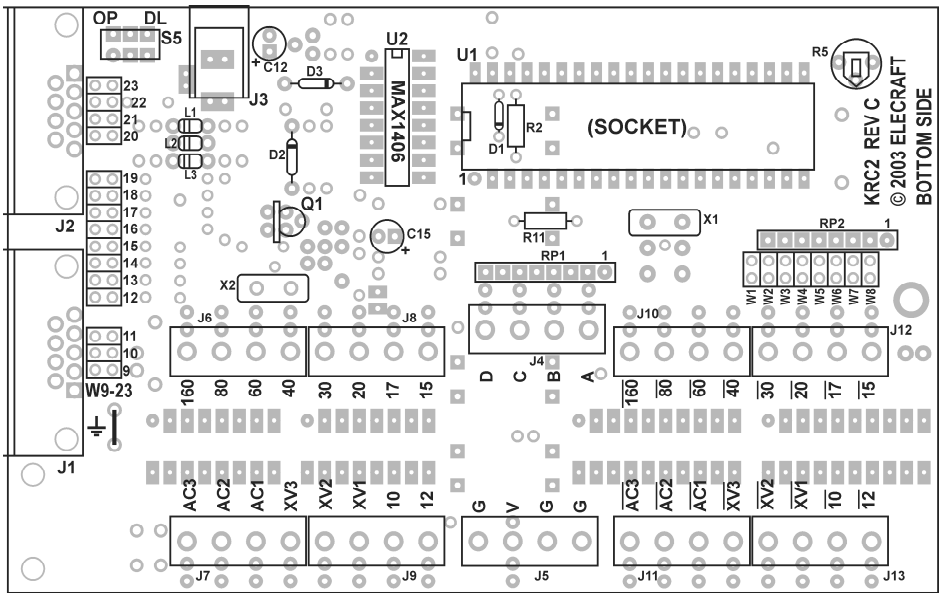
KRC2 PCB corrected bottom view / silk screen parts placement.
